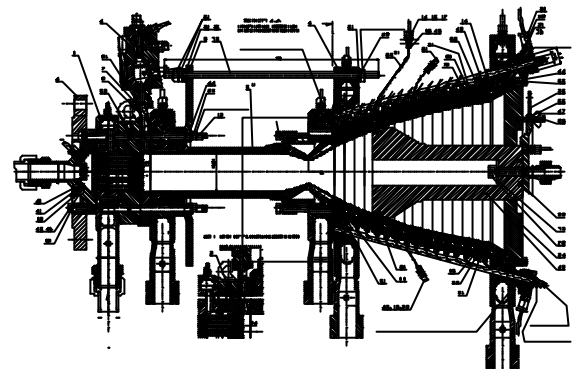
Thrust chamber assembly for Calo A campaign (including sealing tool for tightness tests).
